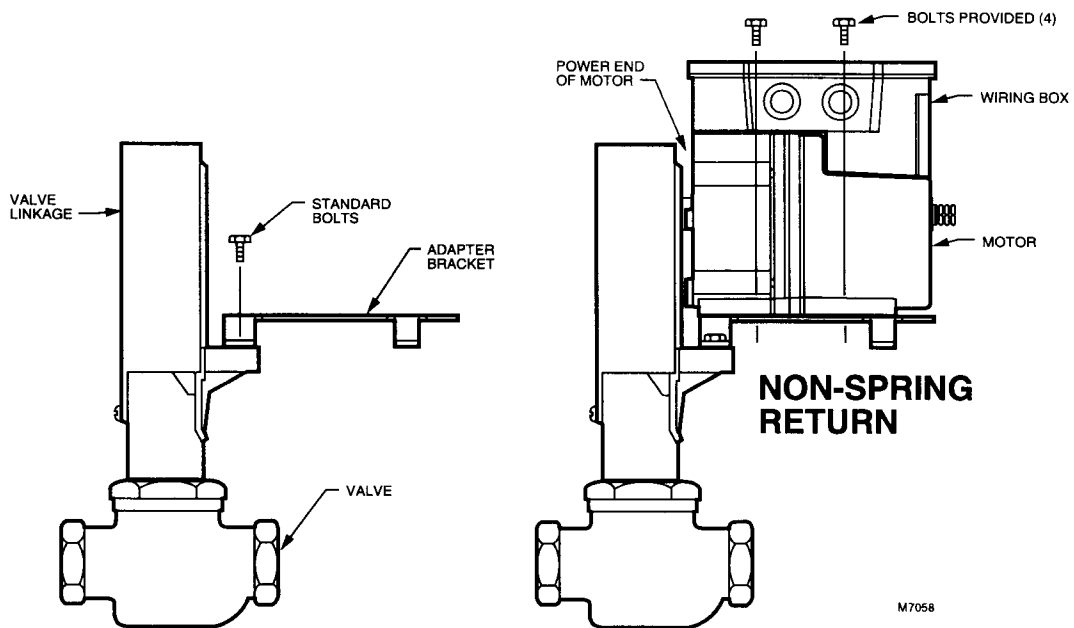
Mounting Modutrol IV Motor on Q618 Valve Linkage.
